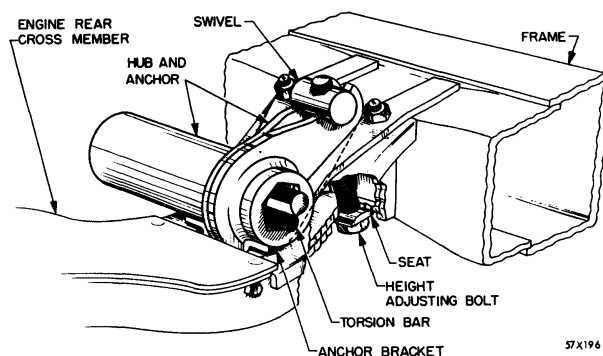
Torsion Bar Spring Cam and Height Adjustment Bolt Assembly
